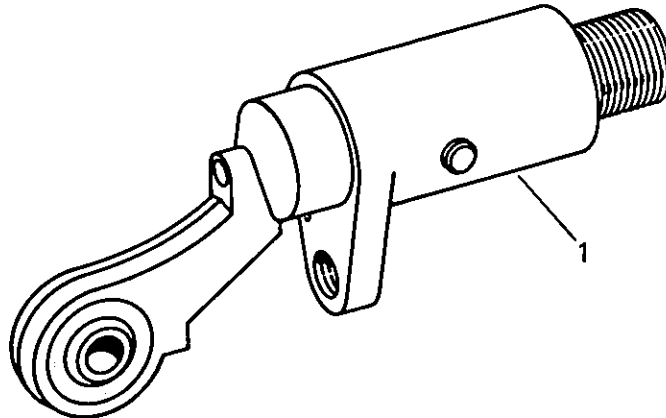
Typical Adjustable Rod End Trimmer Assembly
